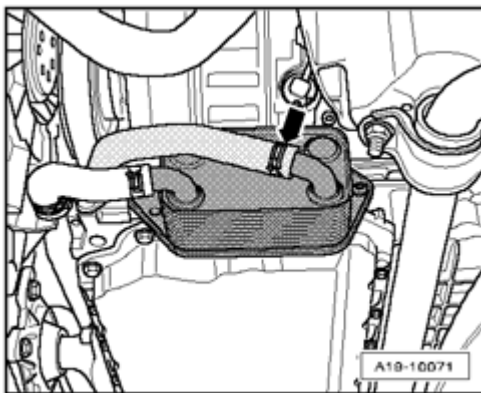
Disconnecting Coolant Hose From Oil Cooler
